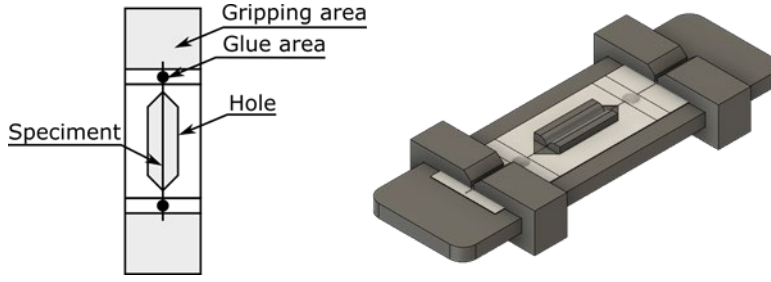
Paper tab (left) and mounting platform (right) for single fiber tensile test
